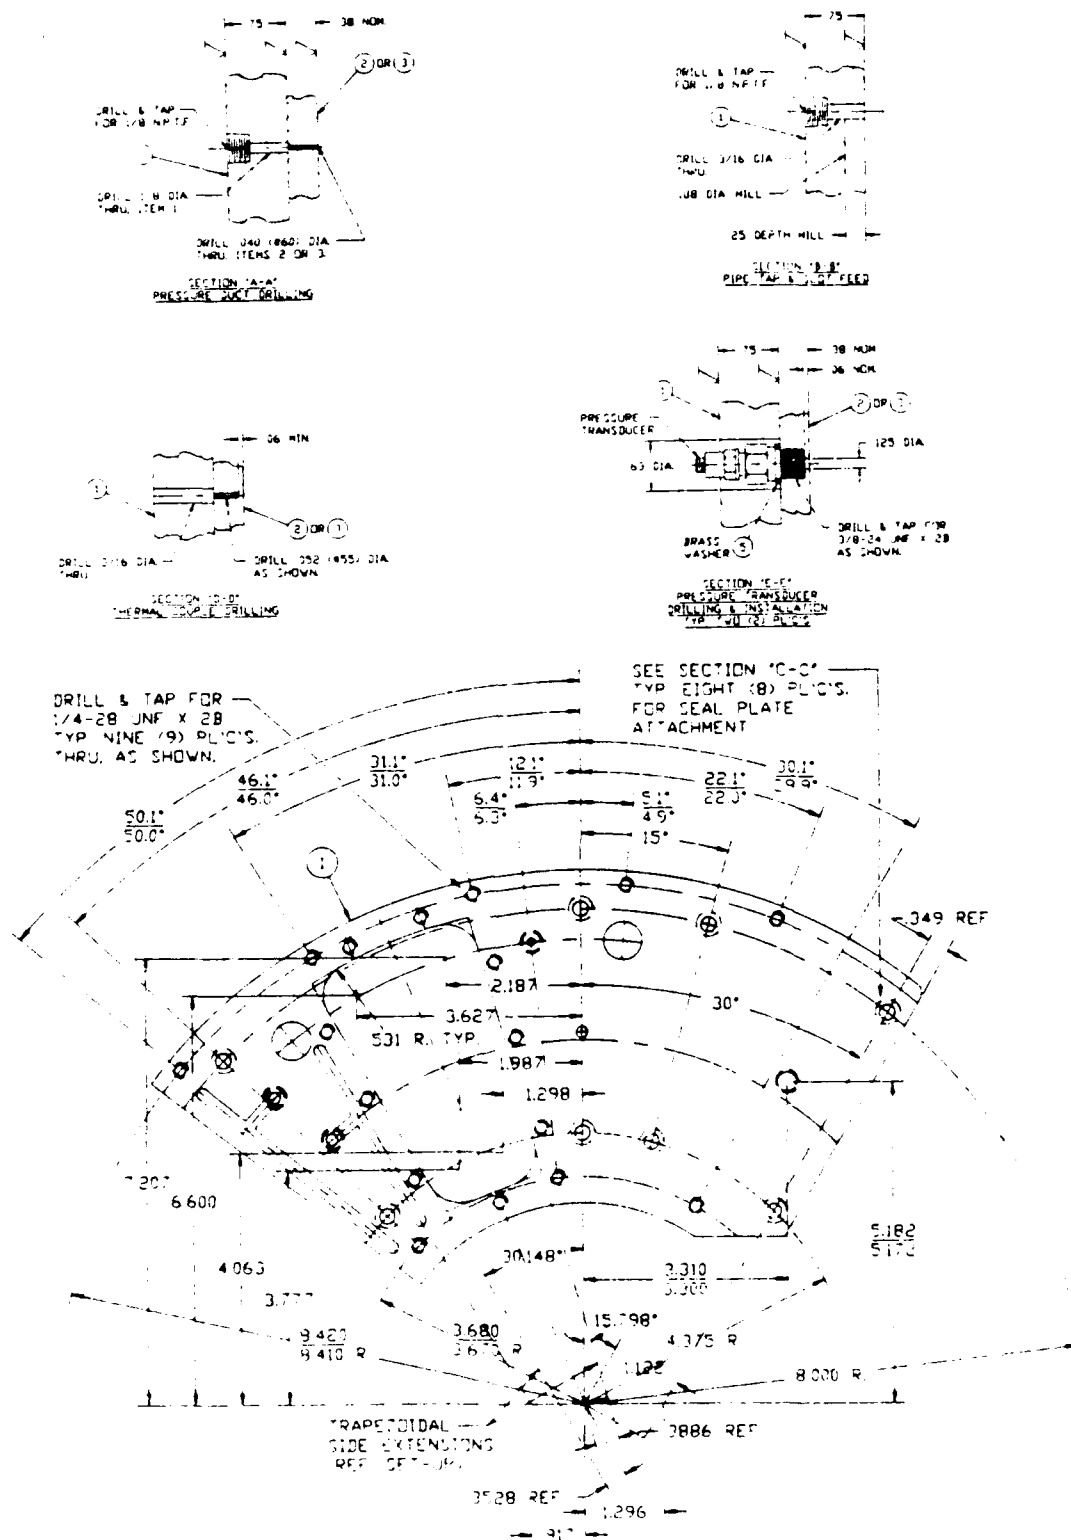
Bronze Seal with Trapezoidal Gas Port Built for and Used in Final Tests
